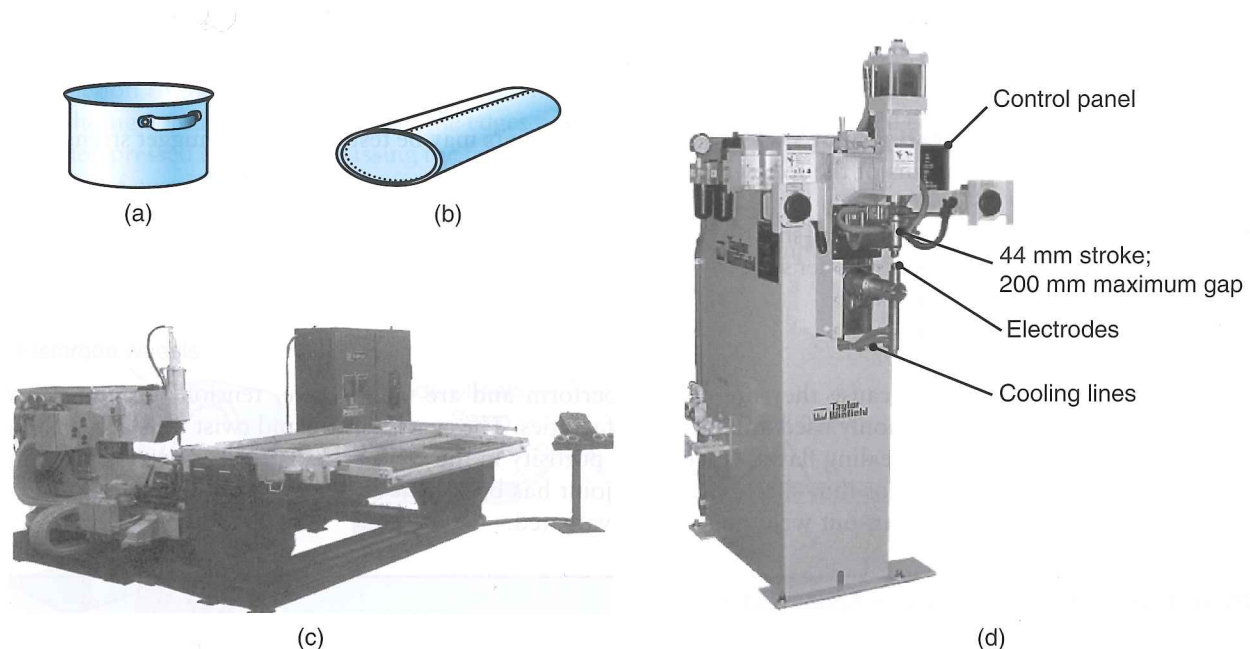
Spot-welded (a) cookware and (b) muffler. (c) A large automated spot-welding machine. The welding tip can move in three principal directions; sheets as large as 2.2 m × 0.55 m can be accommodated in this machine, with proper workpiece supports. (d) A spot welding machine. Source: (c) and (d) Courtesy of Taylor-Winfield Technologies, Inc.
